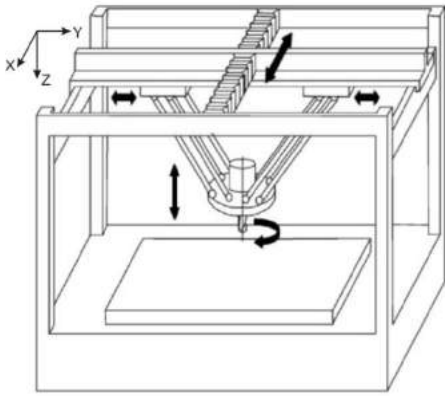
Machine tool with a hybrid kinematic structure of the type biglajd [8]
